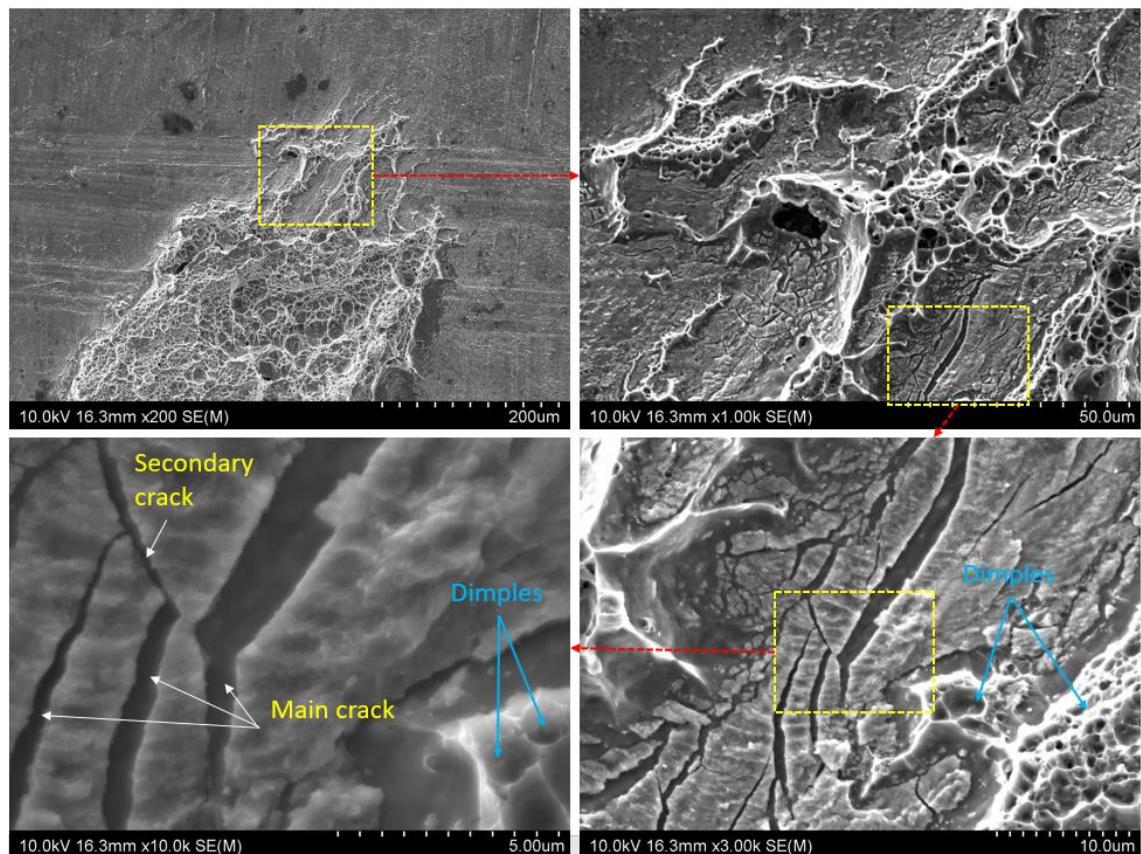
SEM micrograph of N3S6 weld sample fracture showing multiple cracks at the interface with ductile dimples.
